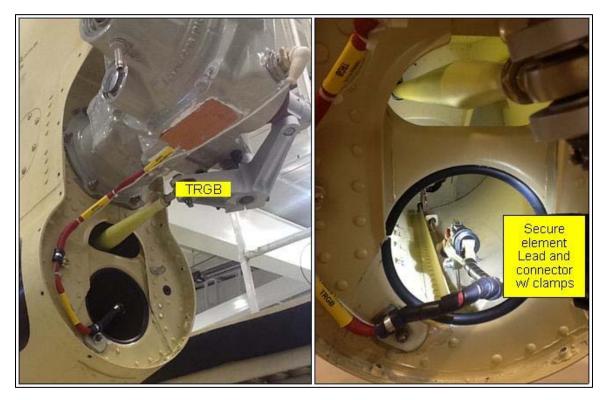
Tail Rotor Gearbox Pad Heat Element p/n: TEP3179-24- Locate on bottom of TRGB lead forward route w/ chip light wire, secure lead and connector w/ clamps. Do Not drill longeron or boom skin, mount clamps w/ Tanis Stud Mount Kit p/n: TU03262 (supplied separately) or equivalent CB4000 series Click Bond Stud Mount (trim base as needed). Connect to lead from junction J-A / tail boom disconnect.
